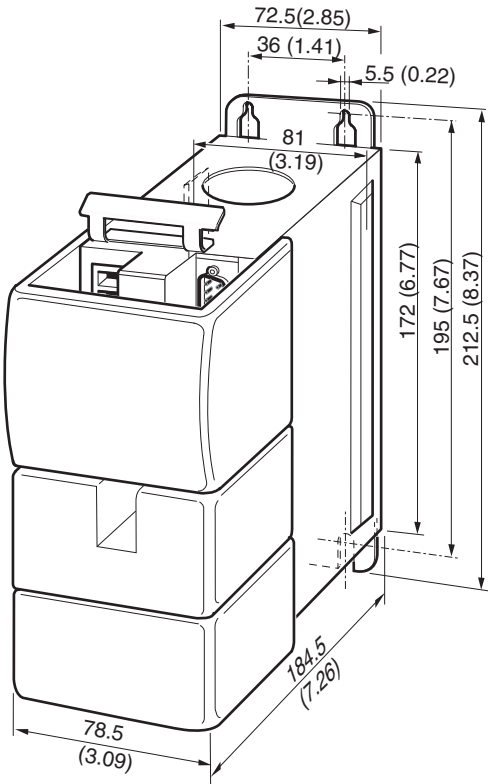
Dimensions TLD011 and TLD012 in mm (in.)
